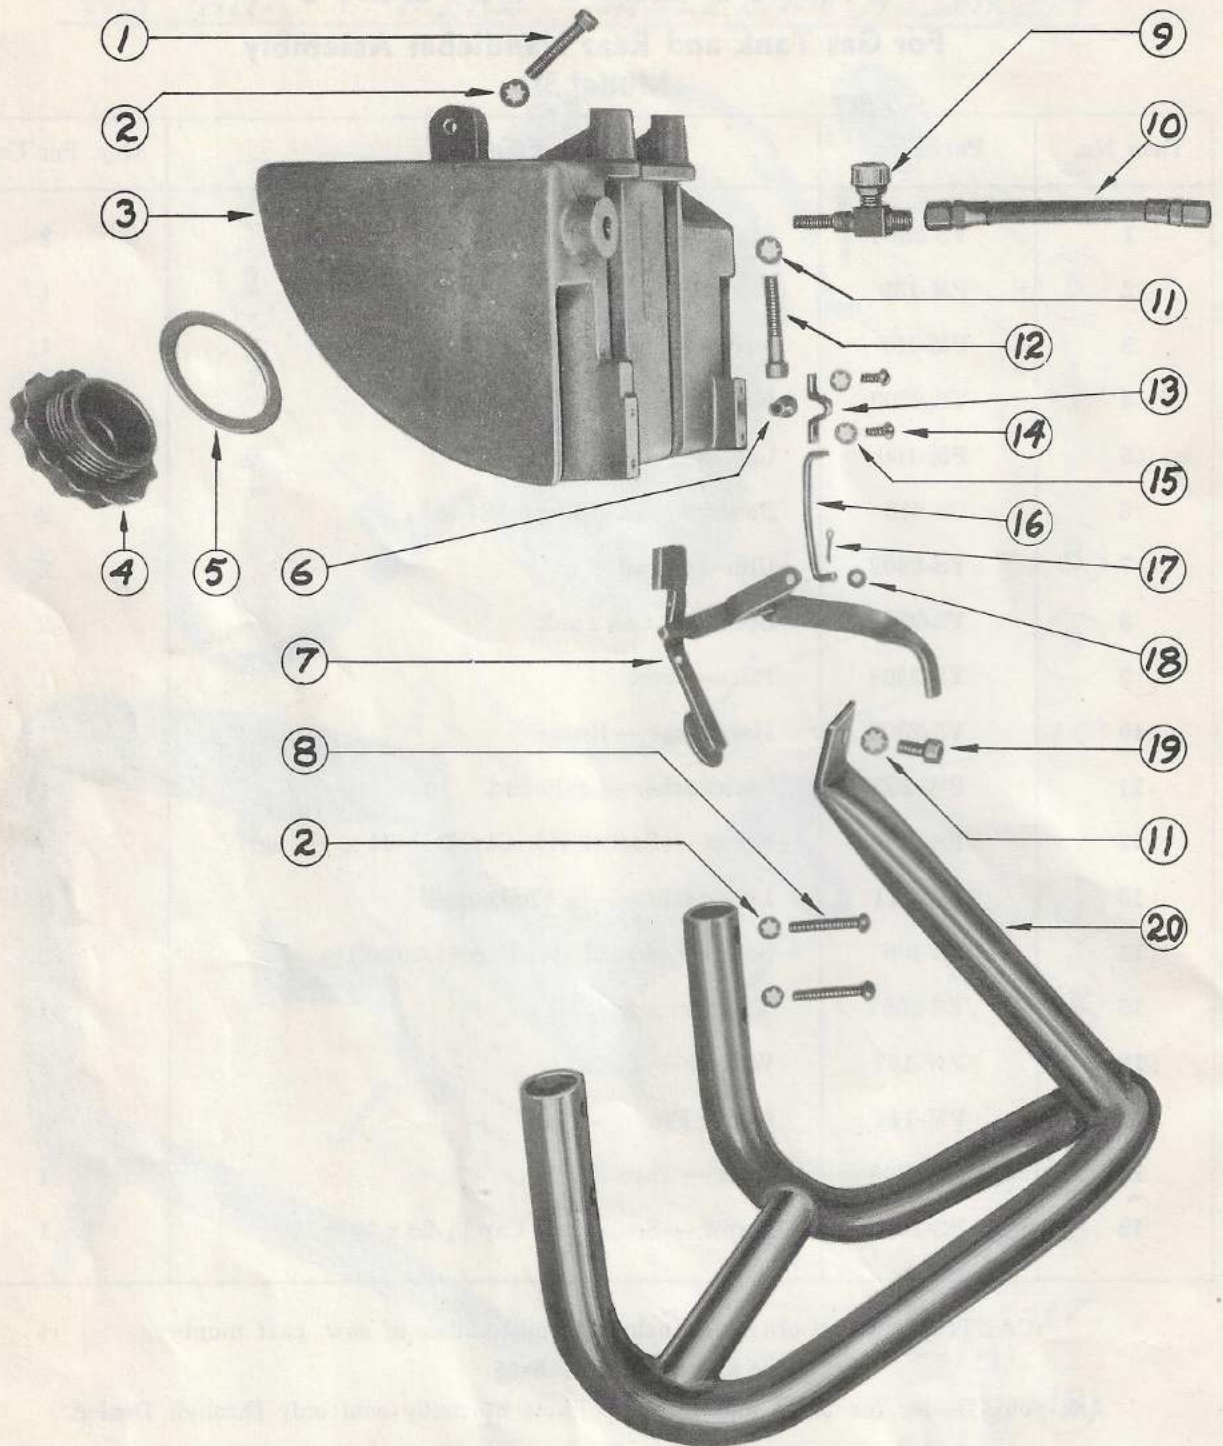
GAS TANK & REAR HANDLE BAR ASSEMBLY
